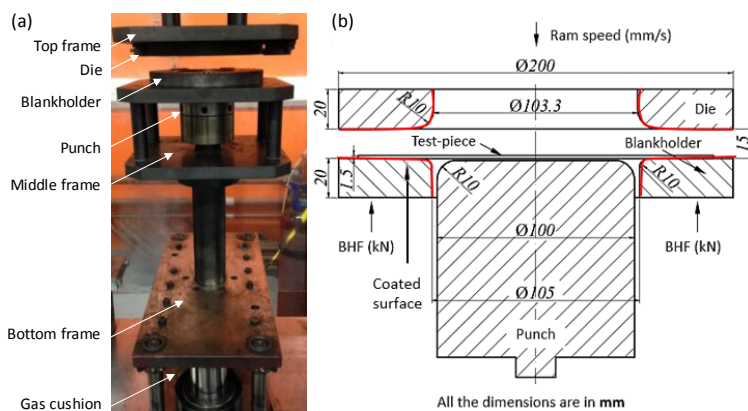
Materials and experimental set-up of hot forming: (a) deep drawing test-rig and (b) geometry and dimensions of tools.
